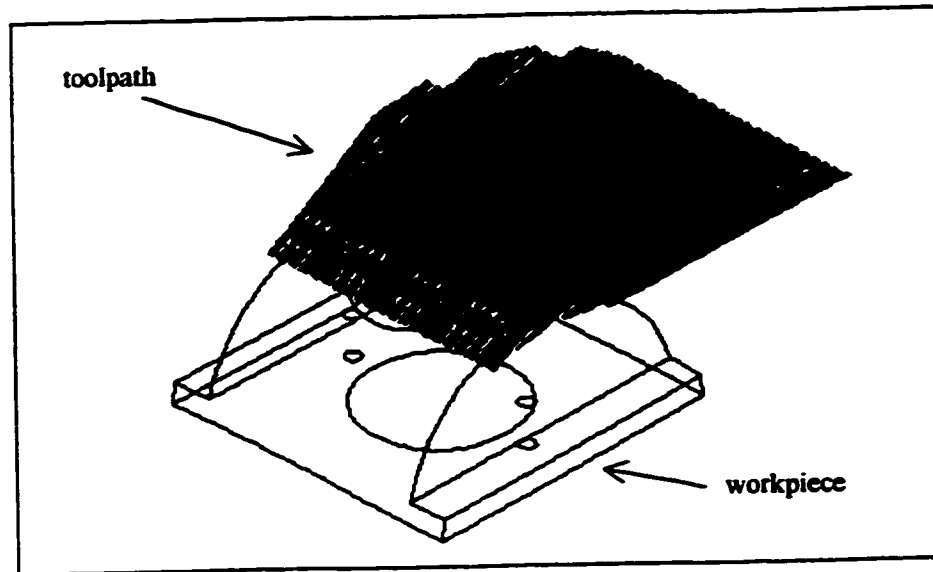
Tool Path for Polishing a Cylindrical Surface
